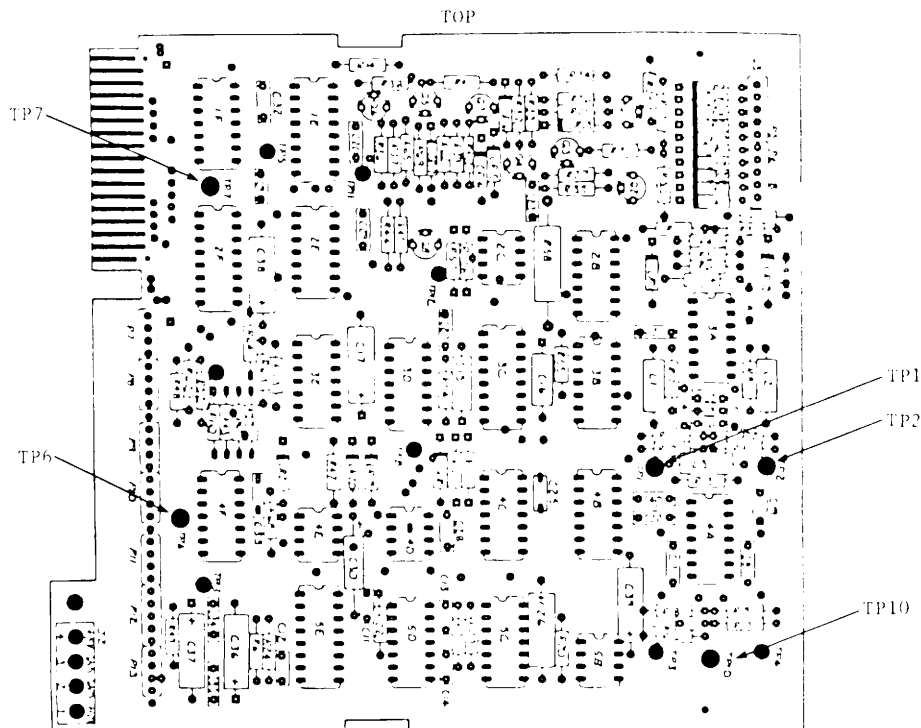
Tandon Floppy Drive PCB Test Point Locations
